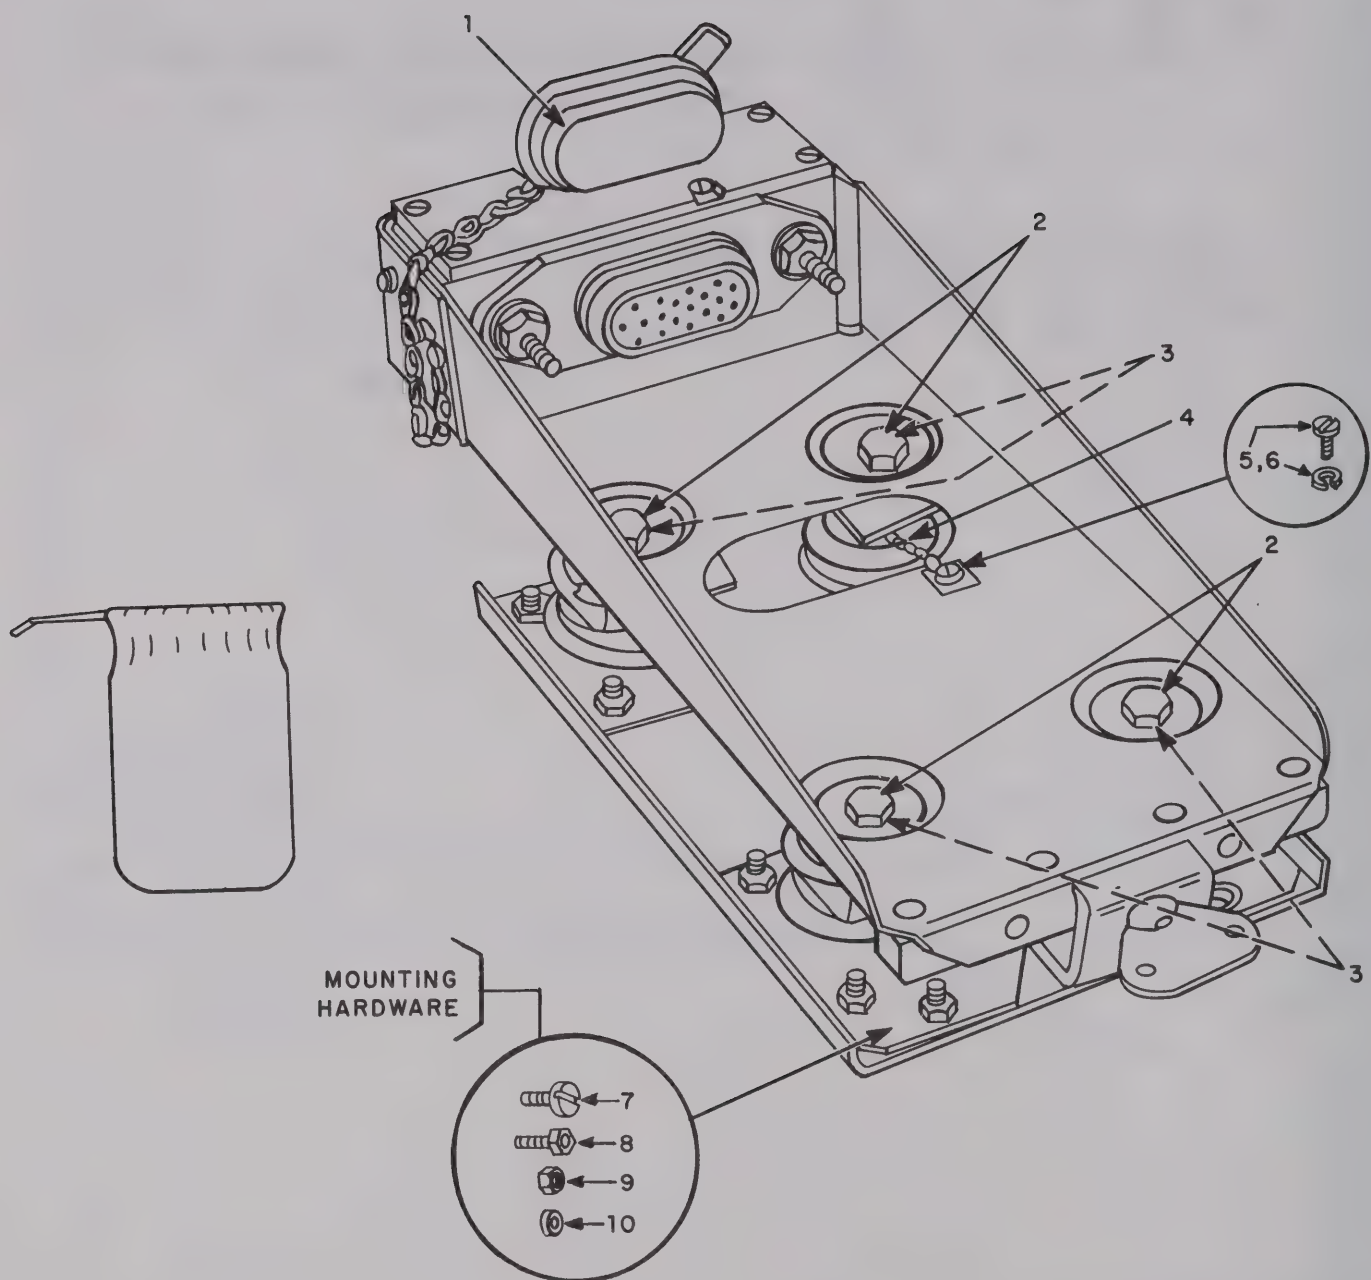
Tray Assembly, MT-1029/VRC (Bottom View).
